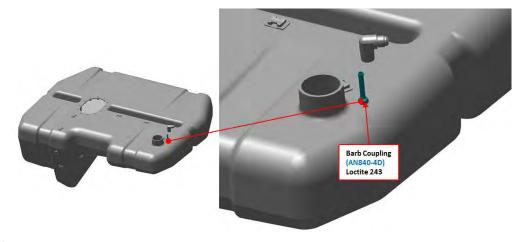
BARB-PIPE THREAD COUPLING INSTALLATION
